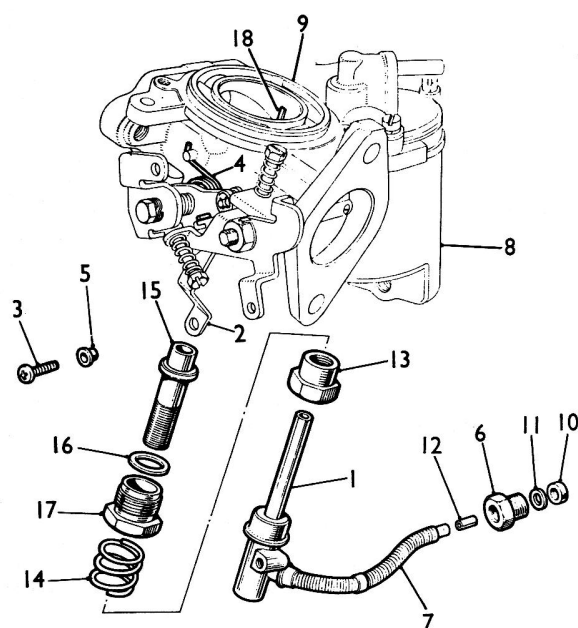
DISMANTLING THE HS6 CARBURETTOR - STAGE 3
